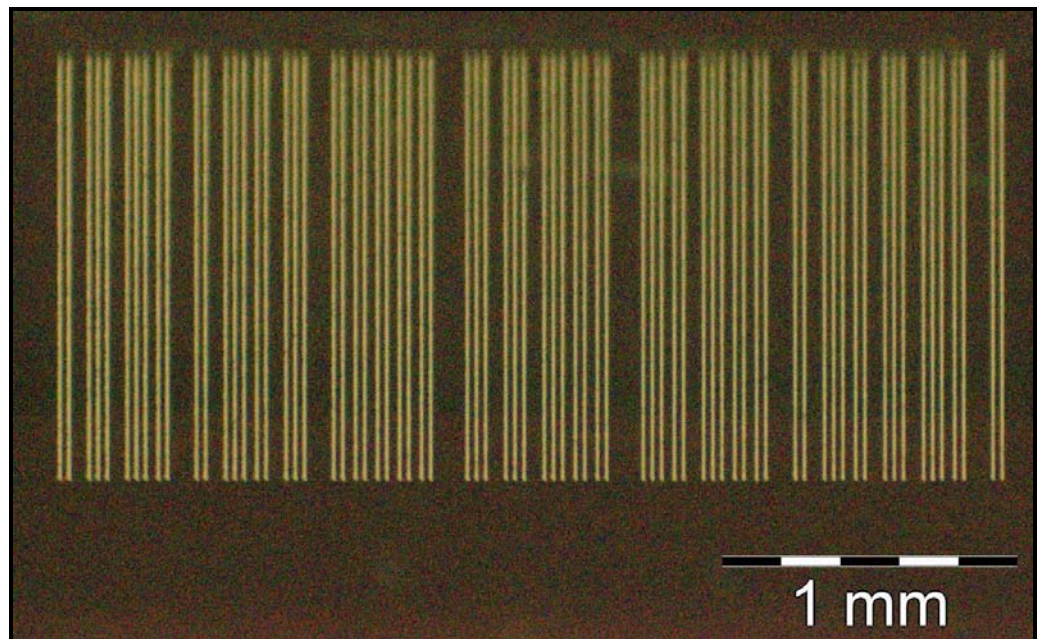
A dark field image of a sub-surface bar code machined in a SiO_2 tube.
